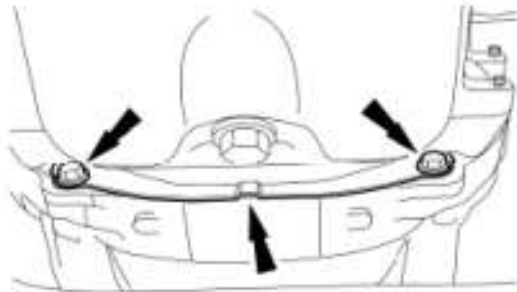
Identifying Transmission Fluid Cooler Tube Bracket
